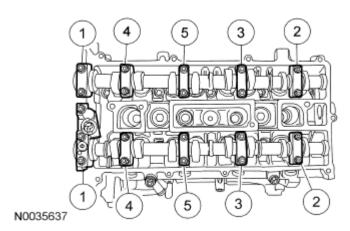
Identifying Camshaft Bearing Cap Bolts Loosening Sequence Courtesy of FORD MOTOR CO.
